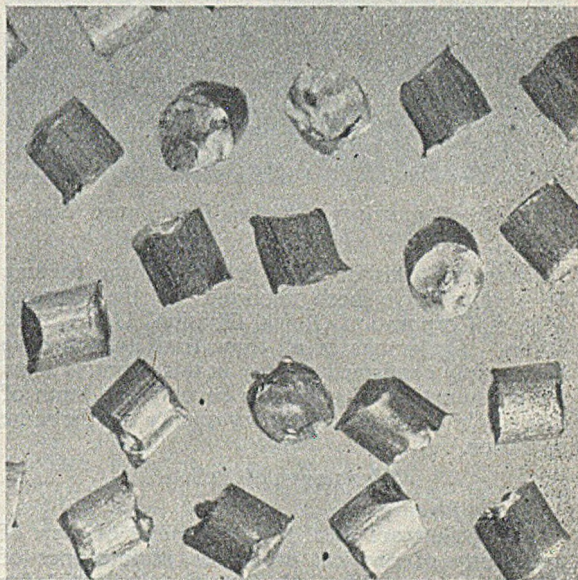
Hard-drawn Steel Wire Pellets,  $\times 6$  diam., showing Sharp Edges.
